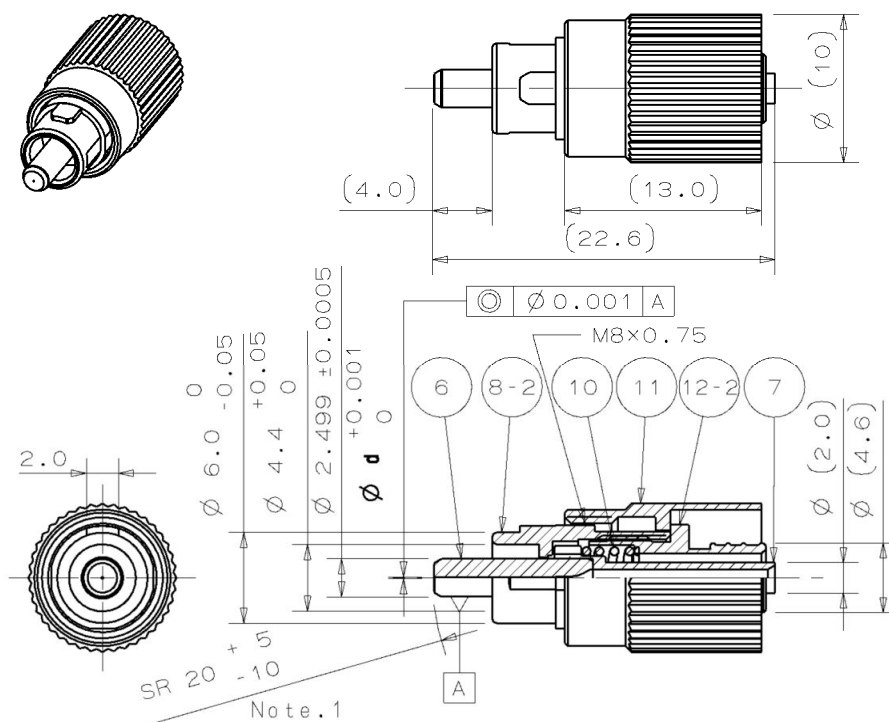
SAP-8 Series Connector Plug (Molding Frame Type)
